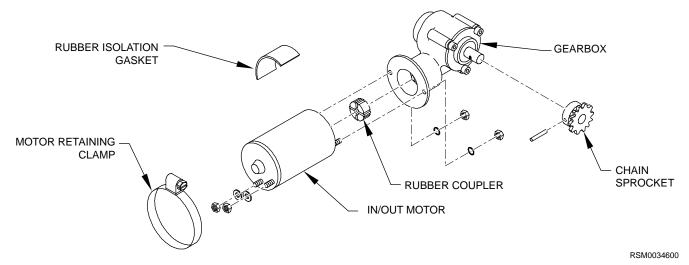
CARRIAGE DRIVE MOTOR ASSEMBLY
